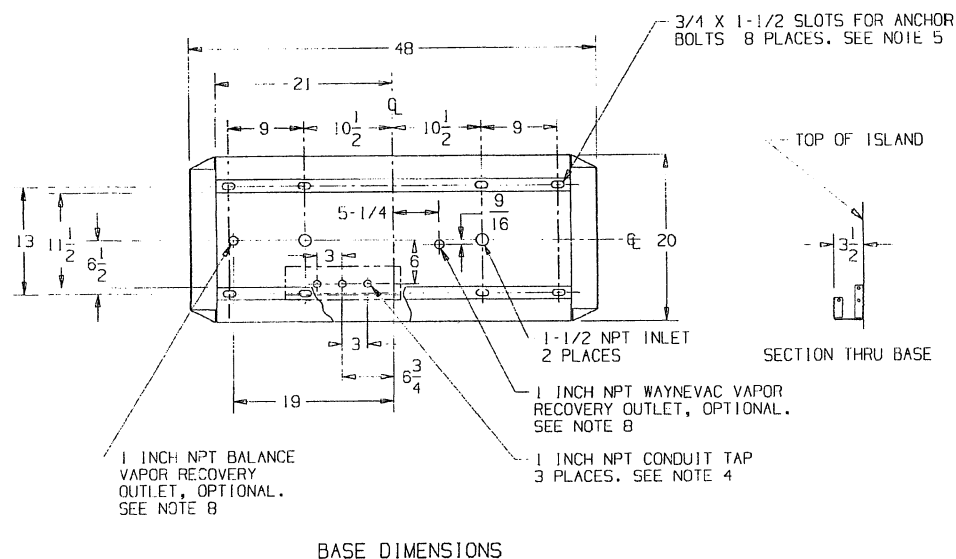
2-7243-C Installation Instructions - 3/V590D/U and 3/V595D/U (Remote)
